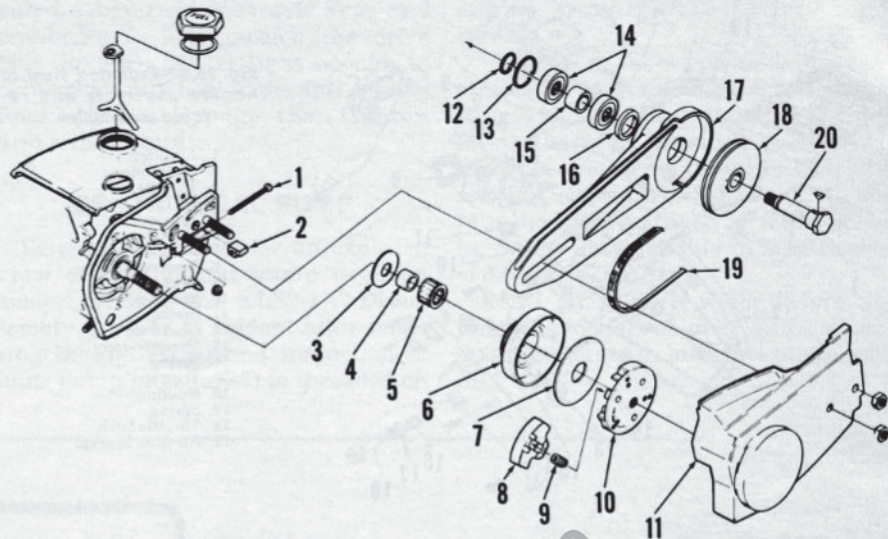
Exploded view of clutch and wheel arm assemblies.
